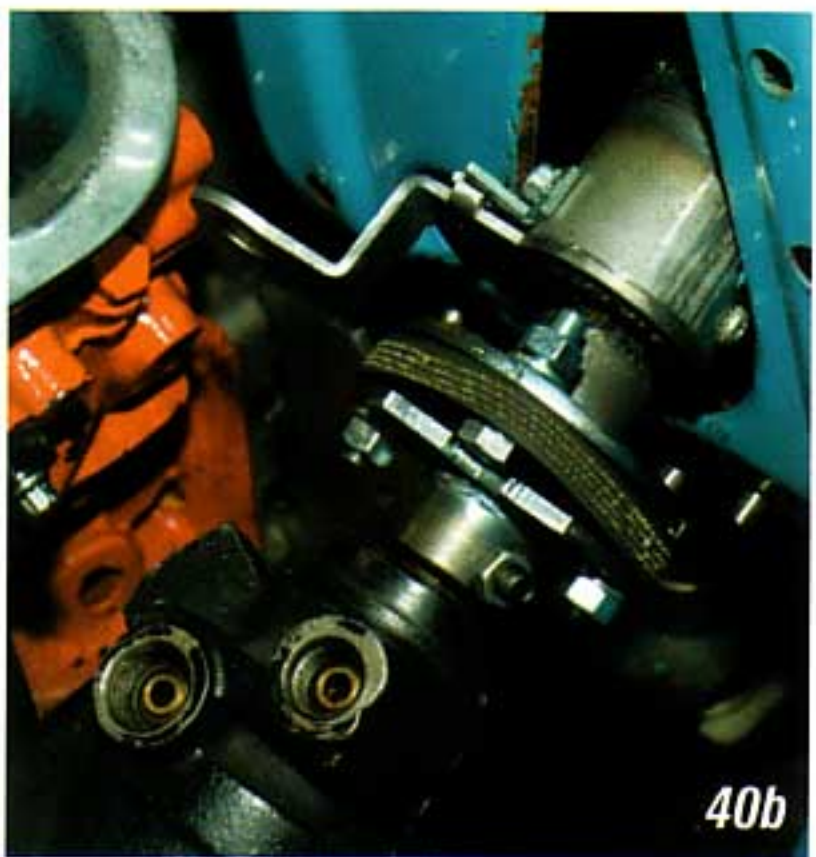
& 40b: Line up the two halves of the coupler and bolt it back together. Remove the upper mast jacket clamp and loosen the lower so the mast jacket can be tilted down. This will allow the shaft to be installed from the bottom. Reinstall the mast jacket clamps, steering wheel, upper mast jacket spring and spring seat. Turn the steering wheel to the left and right and make sure the steering shaft at the bottom of the mast jacket is not rubbing the inside of the shift tube. If the shaft is rubbing on the inside of the shift tube, make some slight adjustments with the lower mast jacket clamp. If the gap between the steering wheel and the mast jacket is not correct, it may be adjusted by loosening the column clamps and moving the column up or down as needed. Complete the installation by connecting the shifter linkage and hoses.
